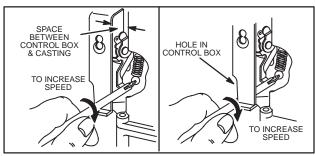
ADJUSTING TOP-NO-LOAD RPM
